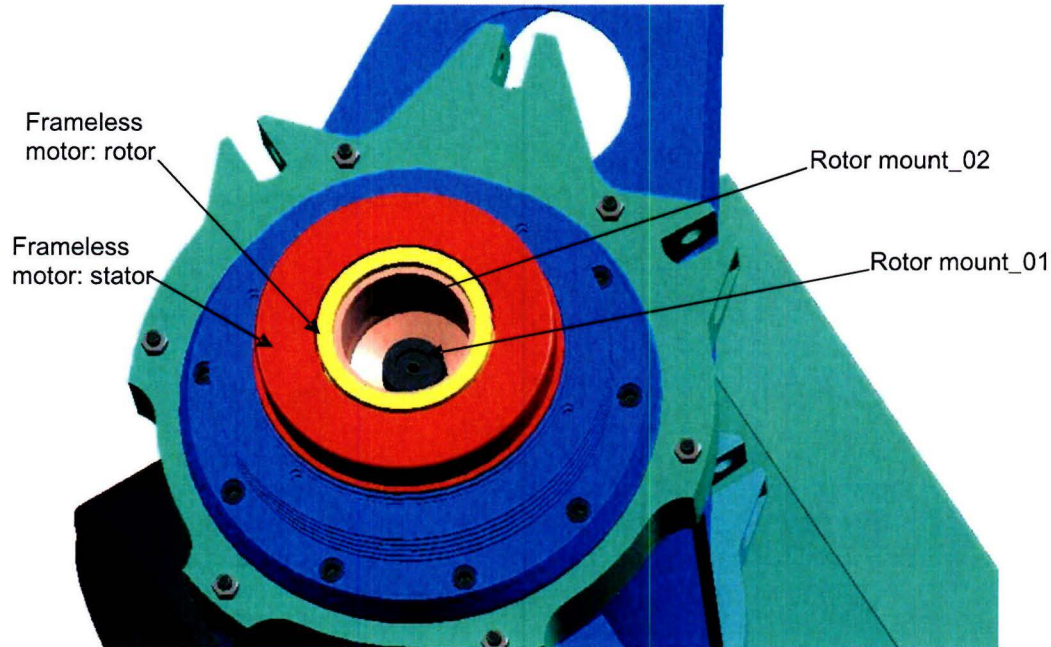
Rotor and stator of the frameless motor placed in the construction
